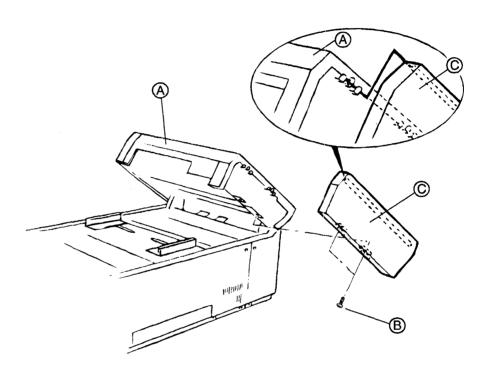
Removing Rear Cover of IS510 Upper Unit
